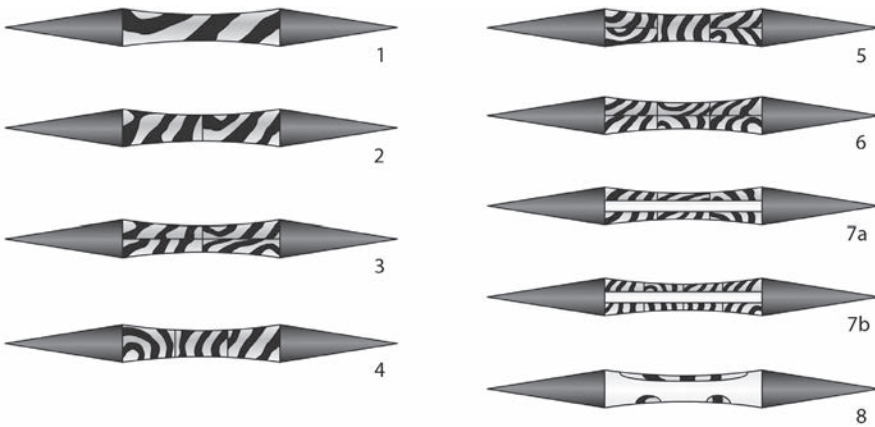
Pattern-welded blade construction types (cross-sectional view). Drawing by P. Kucypera.
